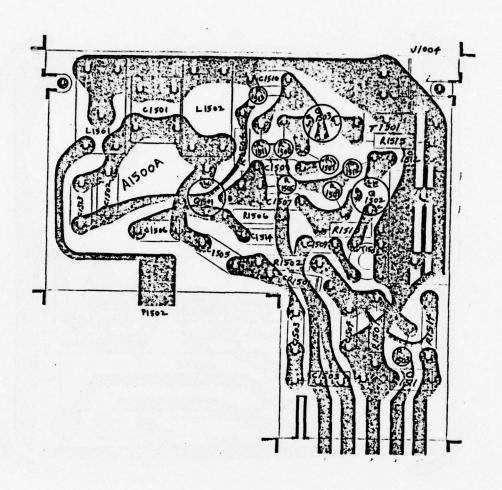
P.C. BOARD LAYOUT FOR THE A1500A LOCAL OSCILLATOR AND BUFFER AMPLIFIERS ASSEMBLY
